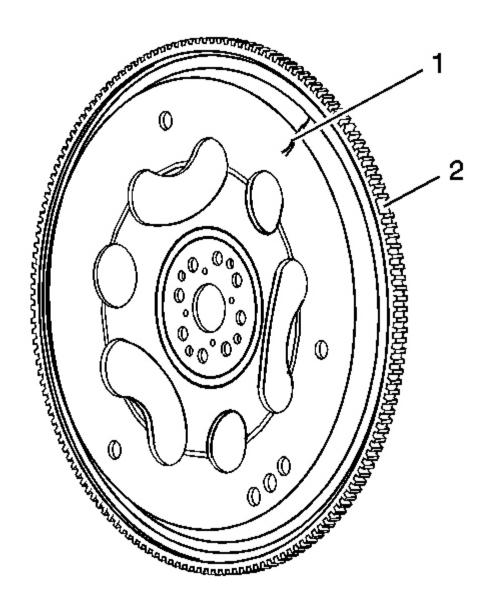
Inspecting Engine Flywheel For Damage - Automatic Transmission Courtesy of GENERAL MOTORS CORP.
